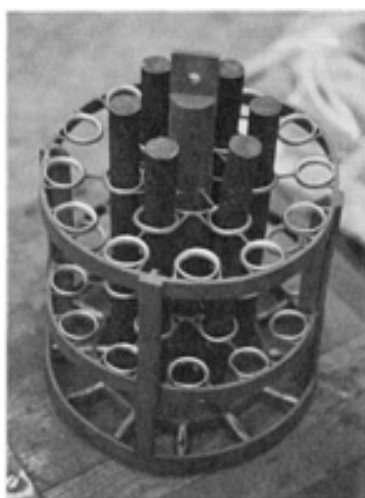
Fixture for solution treating and end quenching of 18 depleted uranium bars
